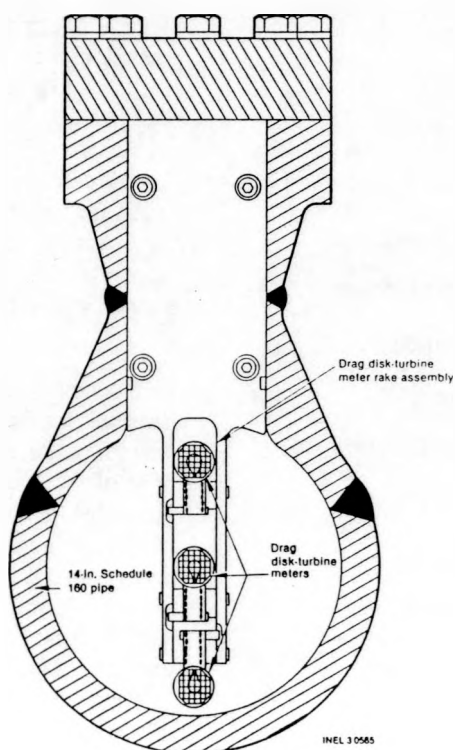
Drag and Disk-Turbine (DDT) assembly.
